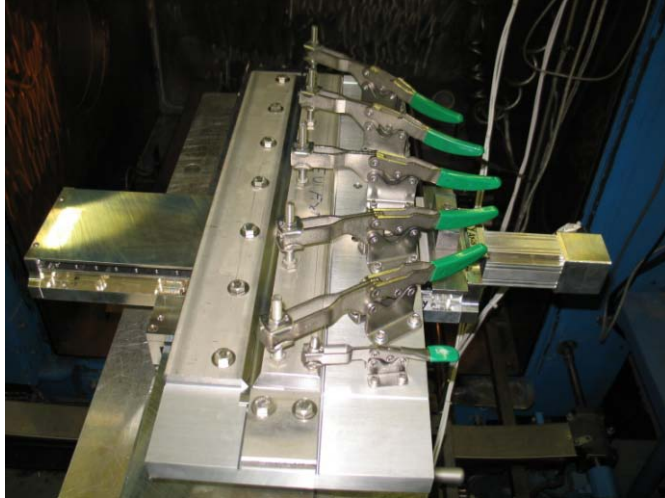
New EBW welding fixture incorporating improvements including stainless steel hold-down bars, higher clamping pressure, and use of toggle clamps for the central region.
